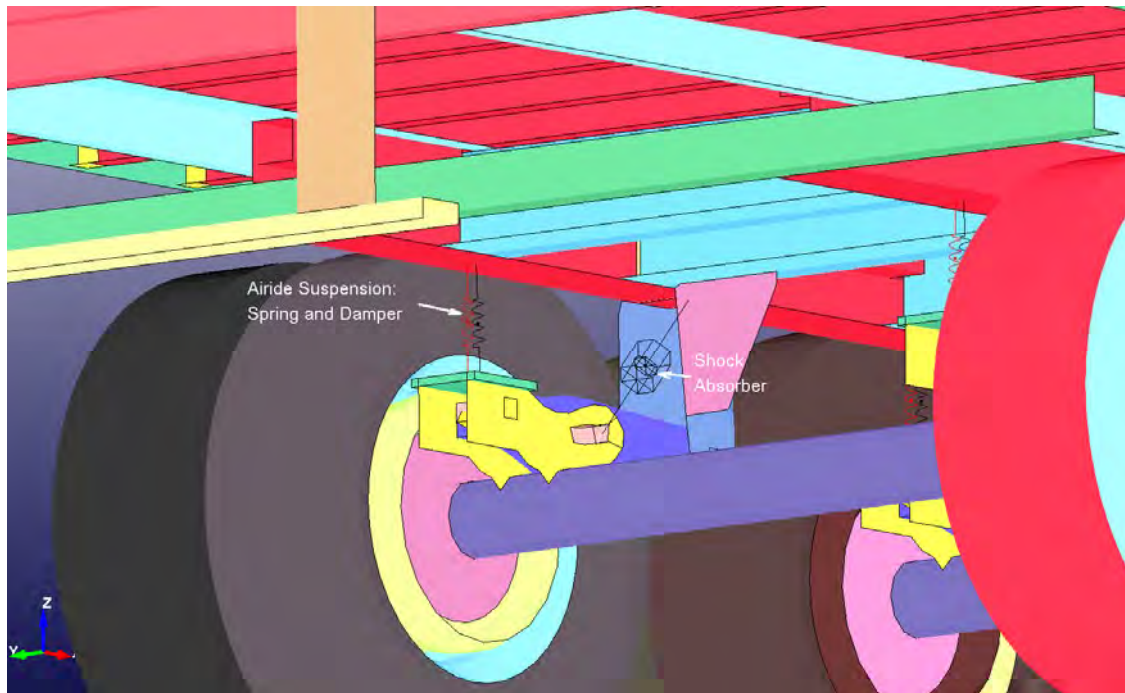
Photograph. Rear view of trailer vehicle frame and bogie.
